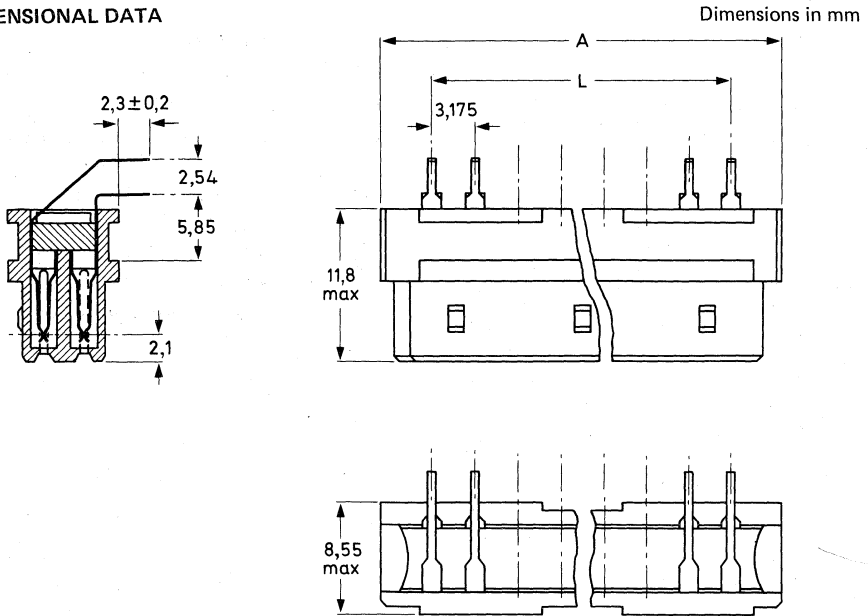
Spring contact box; see Table 2 for dimensions A and L.
